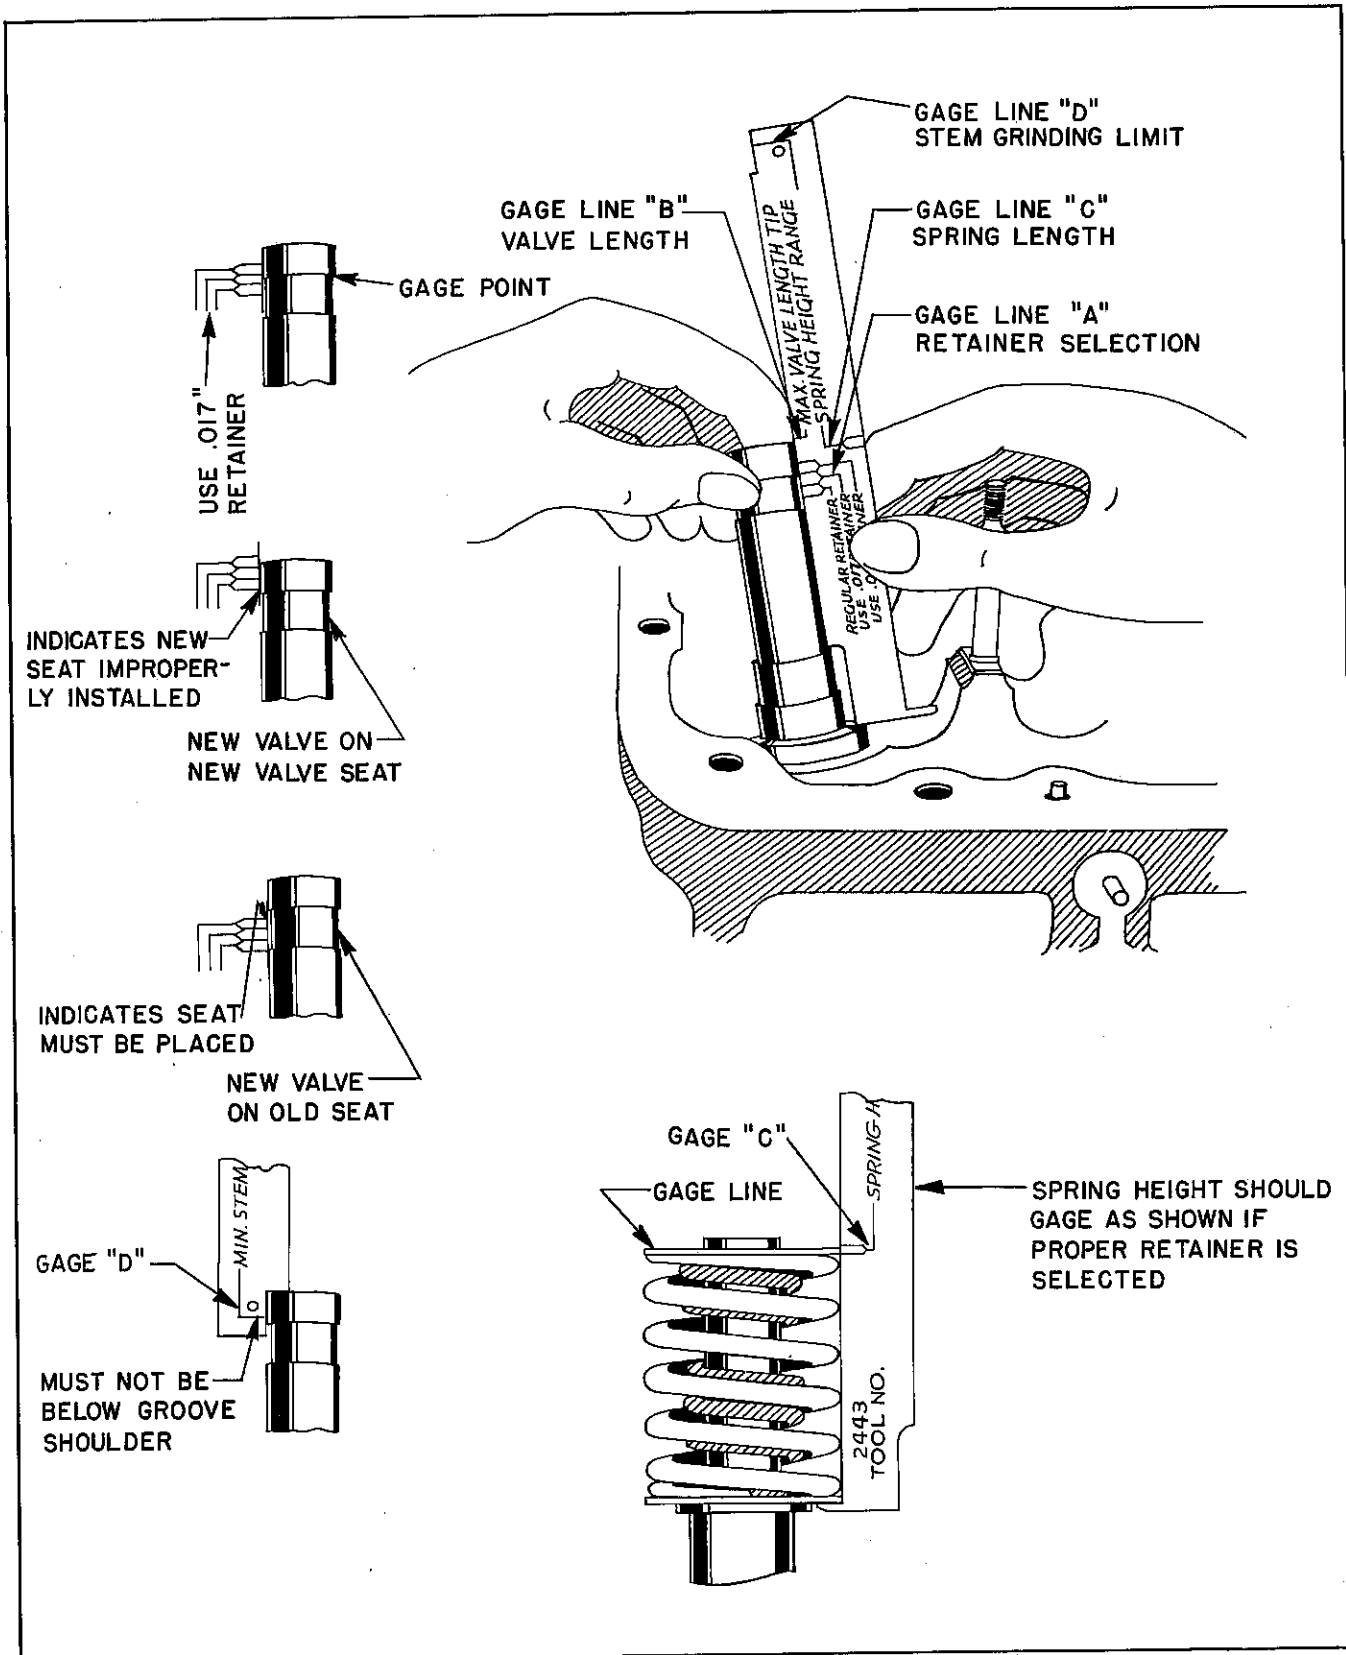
Checking Valve and Spring Height Using Gage No. 2443.
